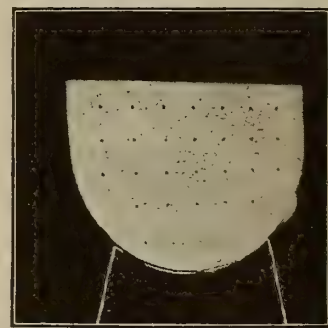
GAS CHAMBER SUPPLYING 26 BOILER TUBES
